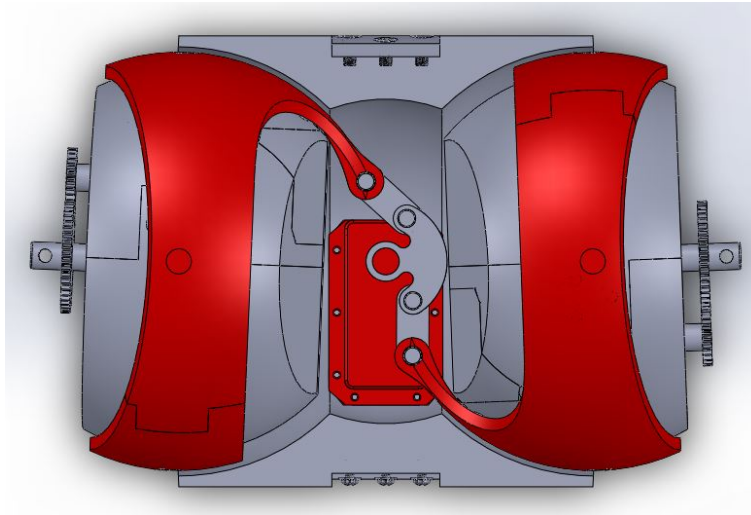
Hip subassemblies in bottom outer gimbal shell.
